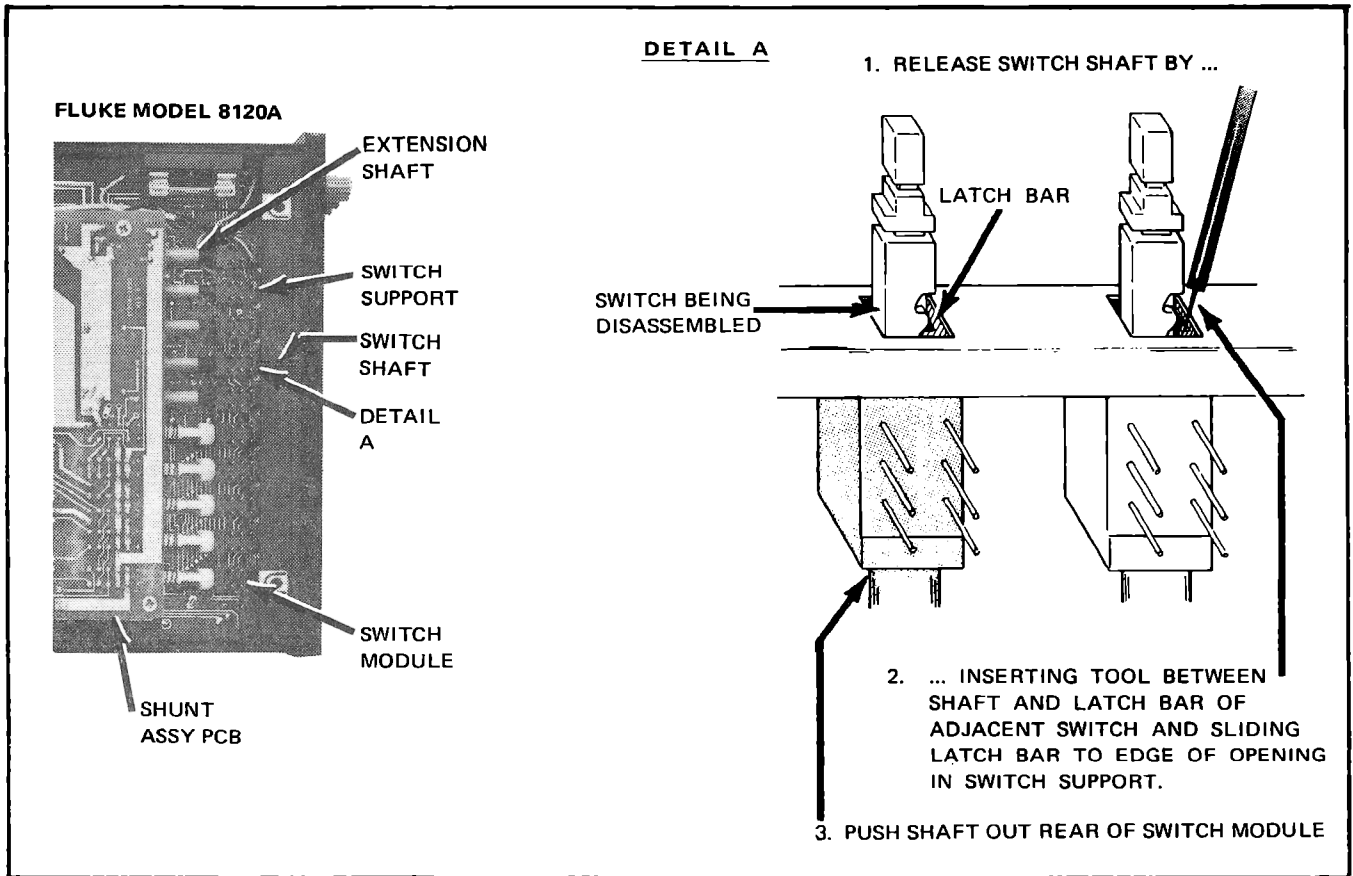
DISASSEMBLY OF FRONT SWITCH MODULES
